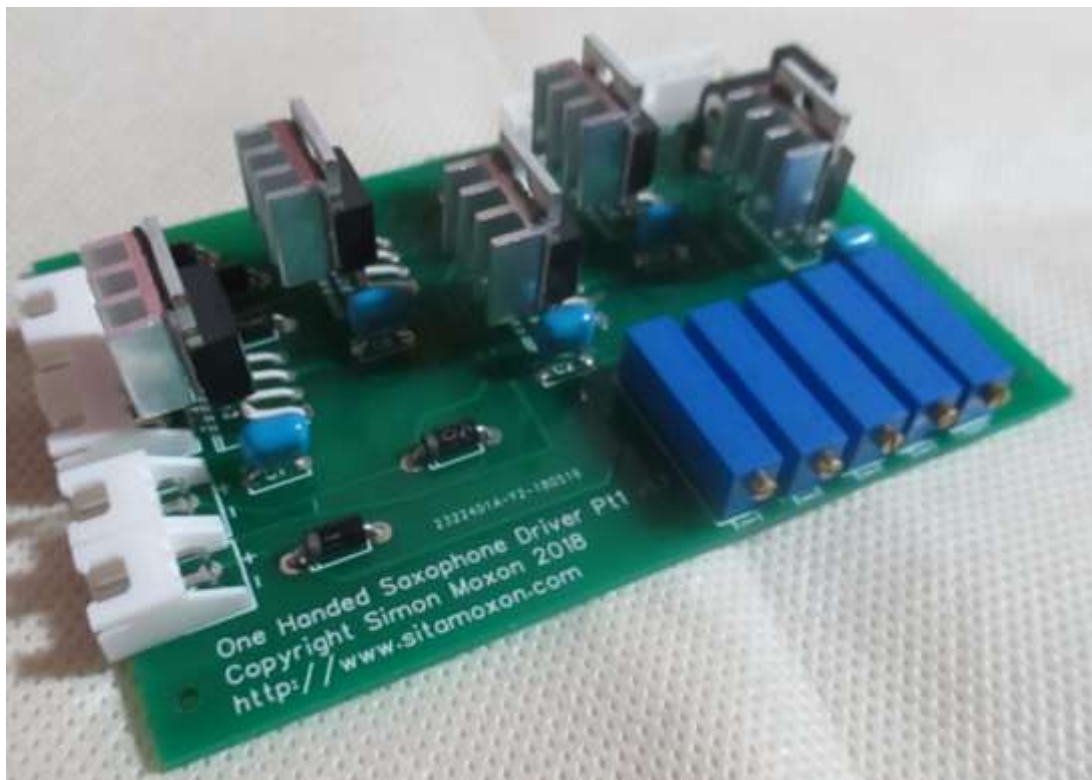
Components soldered onto manufactured PCB Version 1.1
